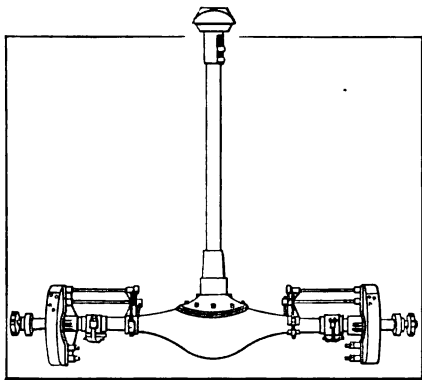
General appearance of the rear axle, showing the propeller tube casing with ball socket end
